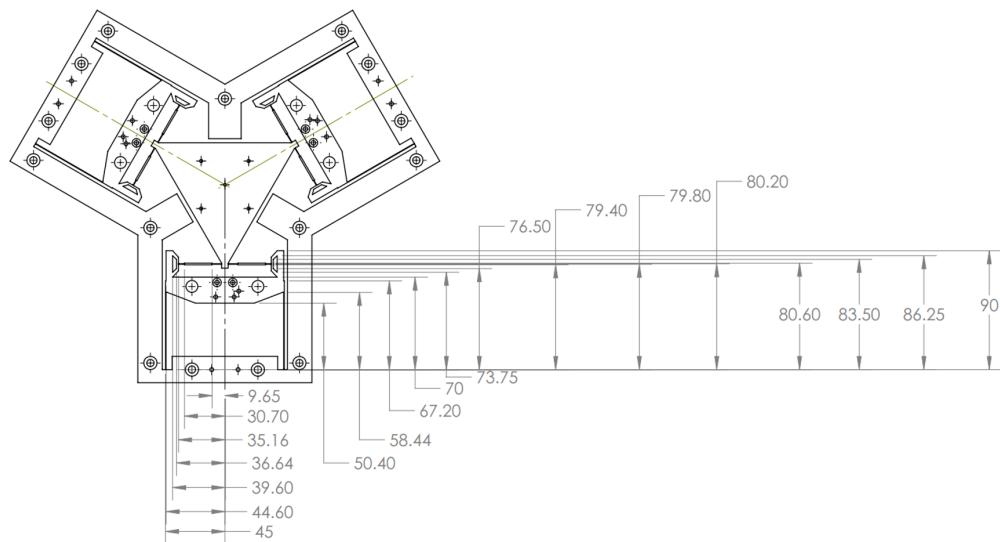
The 2D CAD drawing for the synthesized 3PPR FPM. The units for all the dimensions are in millimeters and the thickness of the joint is 20 mm.
